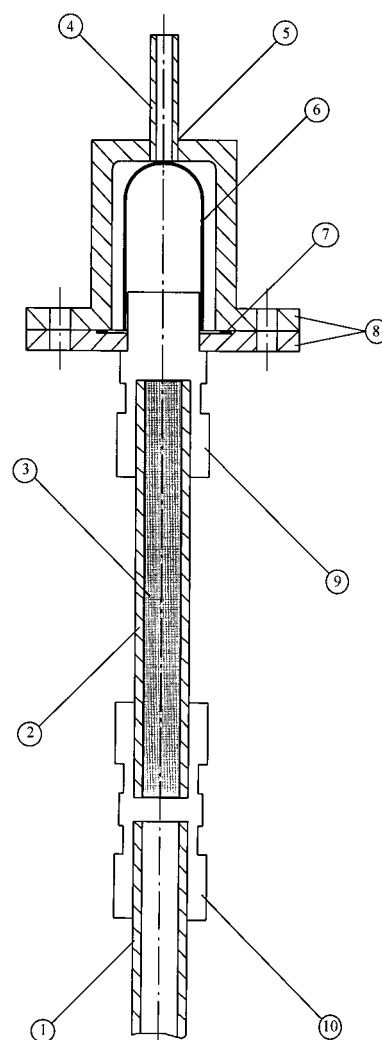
Tar trap assembly. (1) reactor gas exit line; (2) stainless steel tube (o.d. $\frac{1}{2}$ in.); (3) wire-mesh packing; (4) gas exit line; (5) weld; (6) Soxhlet thimble; (7) copper ring; (8) stainless steel housing; (9) male weld connector; (10) union fitting.
